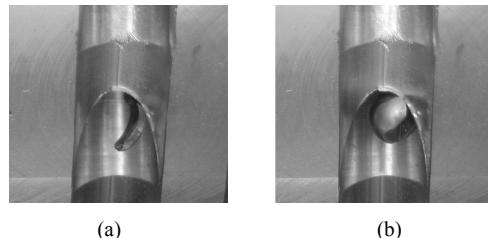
Comparison of the cutter heads: (a) the second design [9] in excessive engagement with the burr edge, (b) the third design [10] with limited exposure of the cutting edge.
